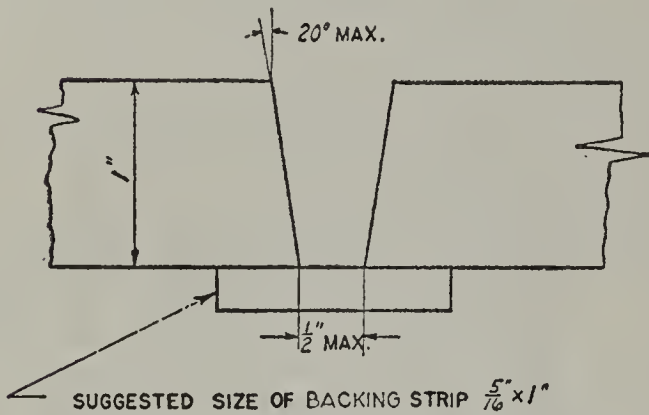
(a)—Butt Joint for Plate 1 In. Thick.
